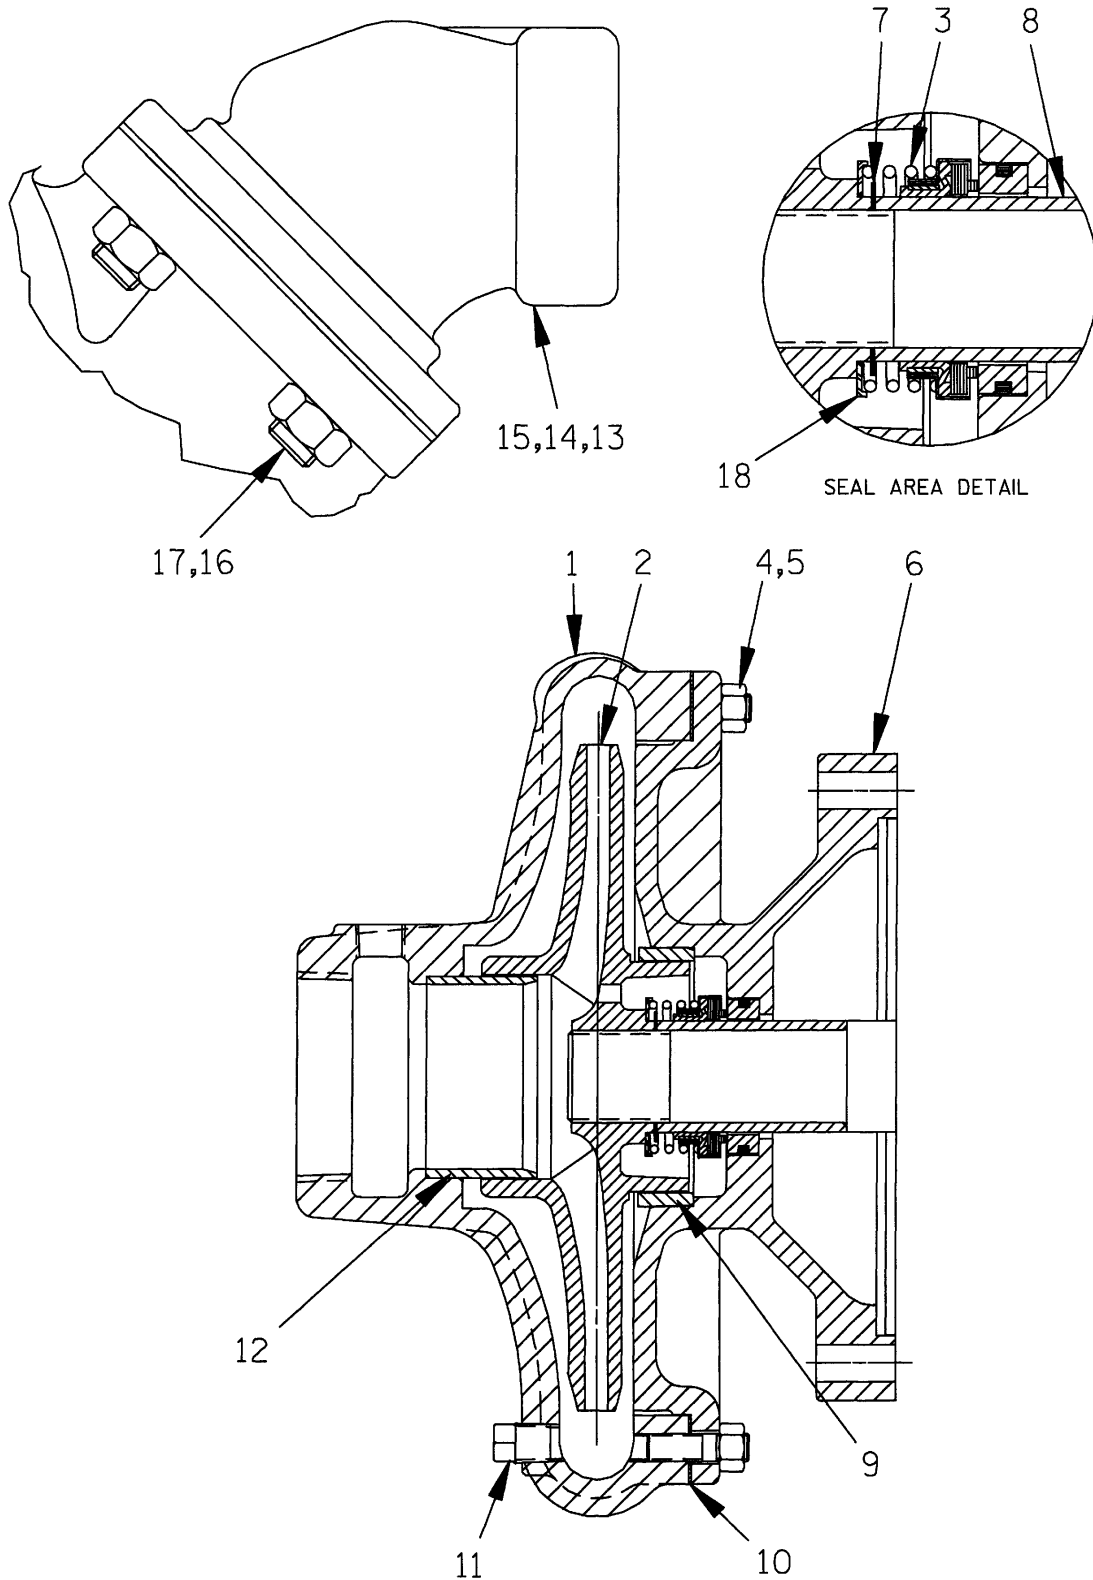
62 1/2D1-(CH23) Pump End Assembly
